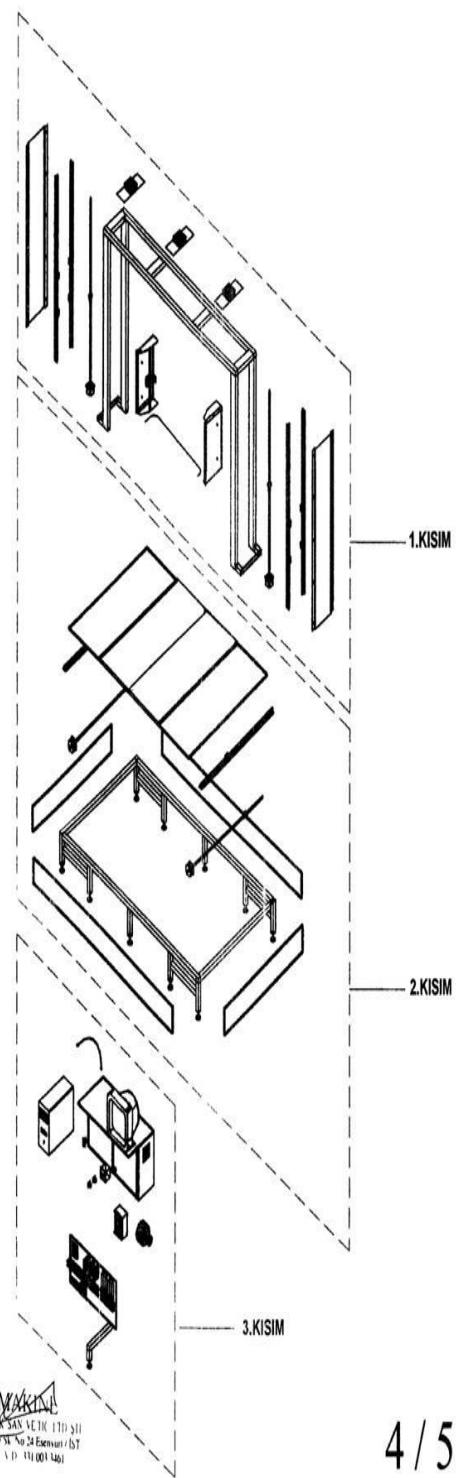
2007/04961 'CNC Foam Cutting Machine'[C]
